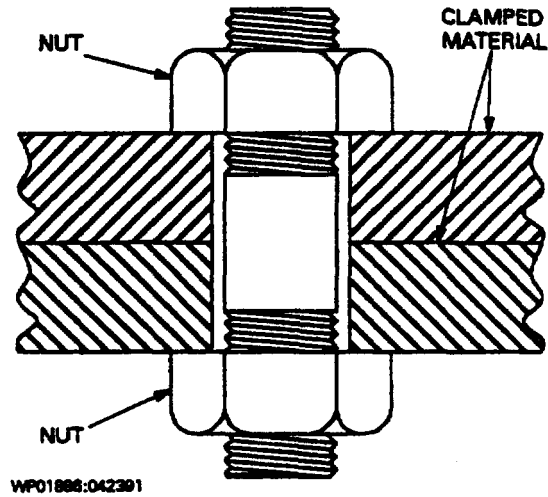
Type I Assembly: Bolt-Stud/Nut, Flat Face Flange or Plate
